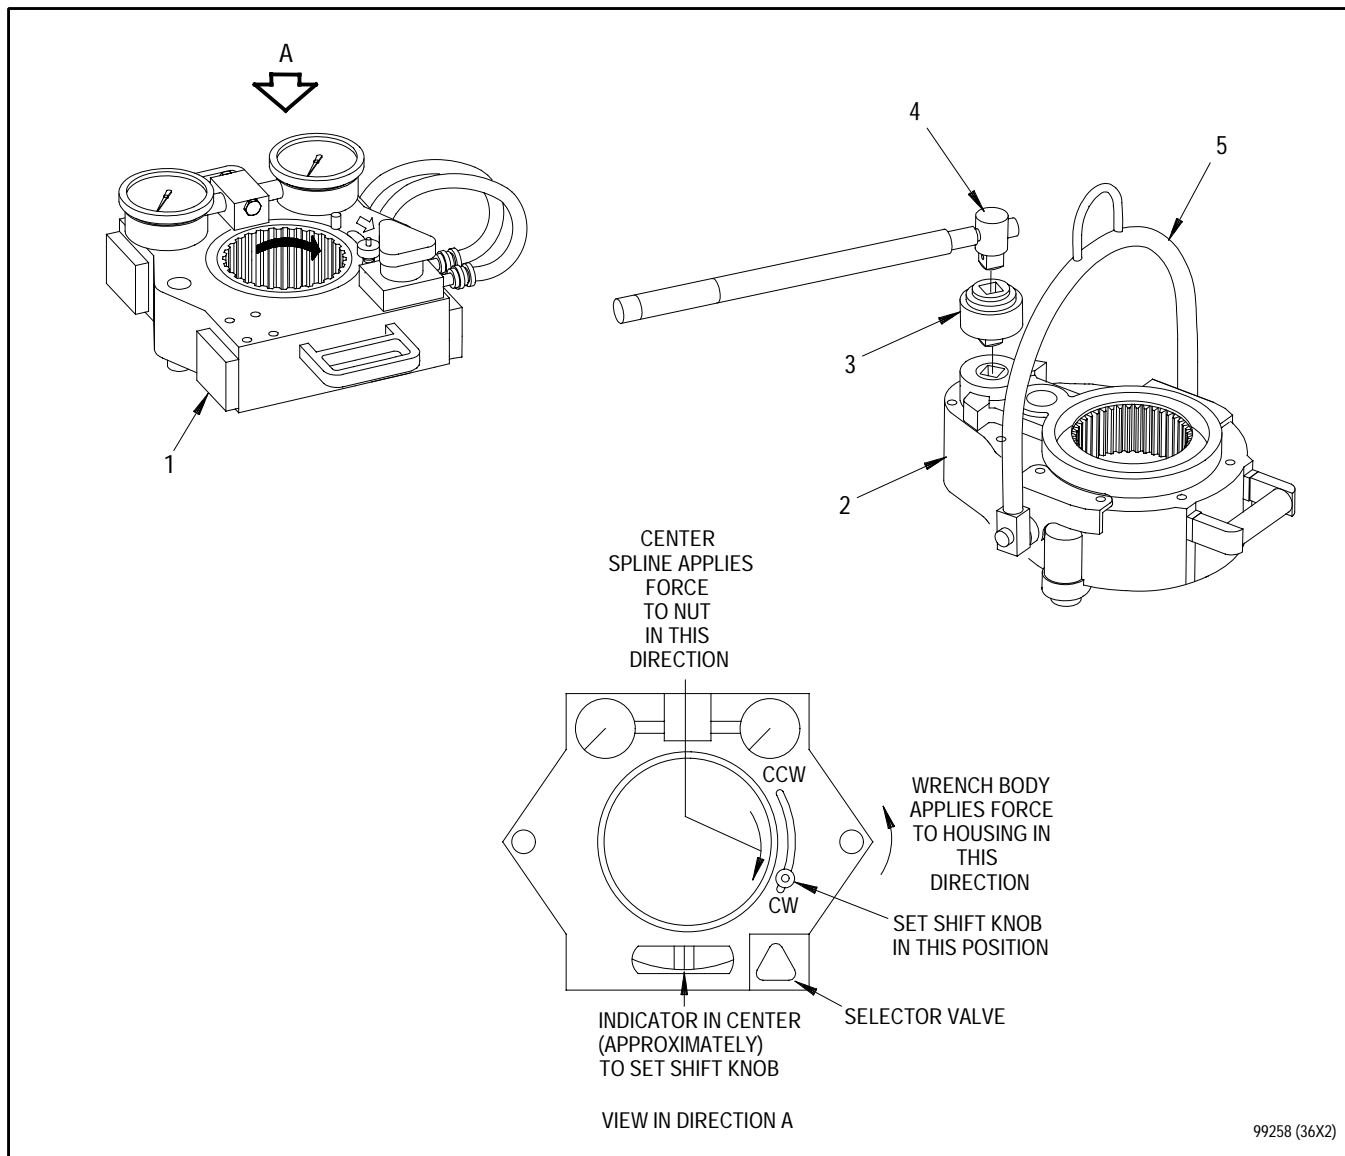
No. 4 Bearing Housing and Outer Race - Disassembly
